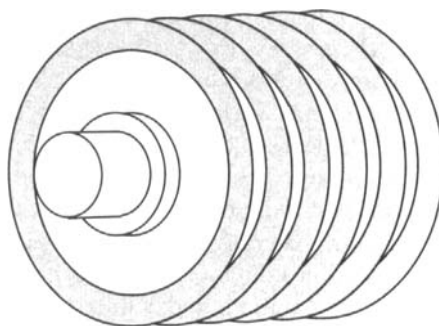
Ganged dicing wheel blades can be used for scribing grooves into the silicon
